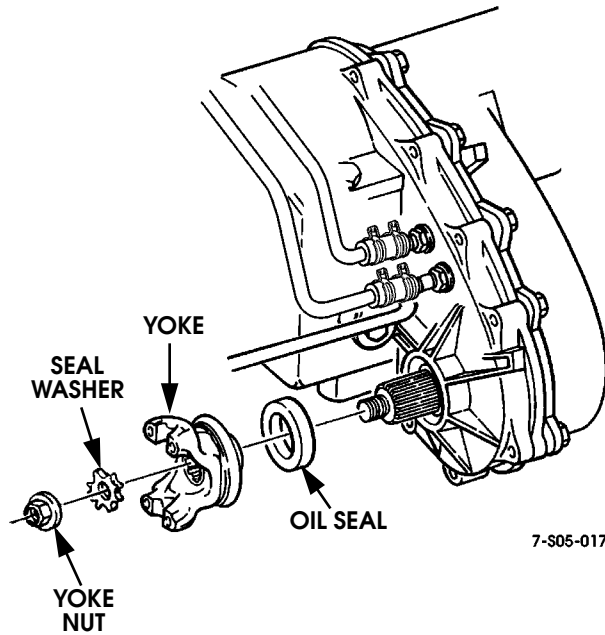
Front Output Shaft Yoke and Seal Removal/Installation
